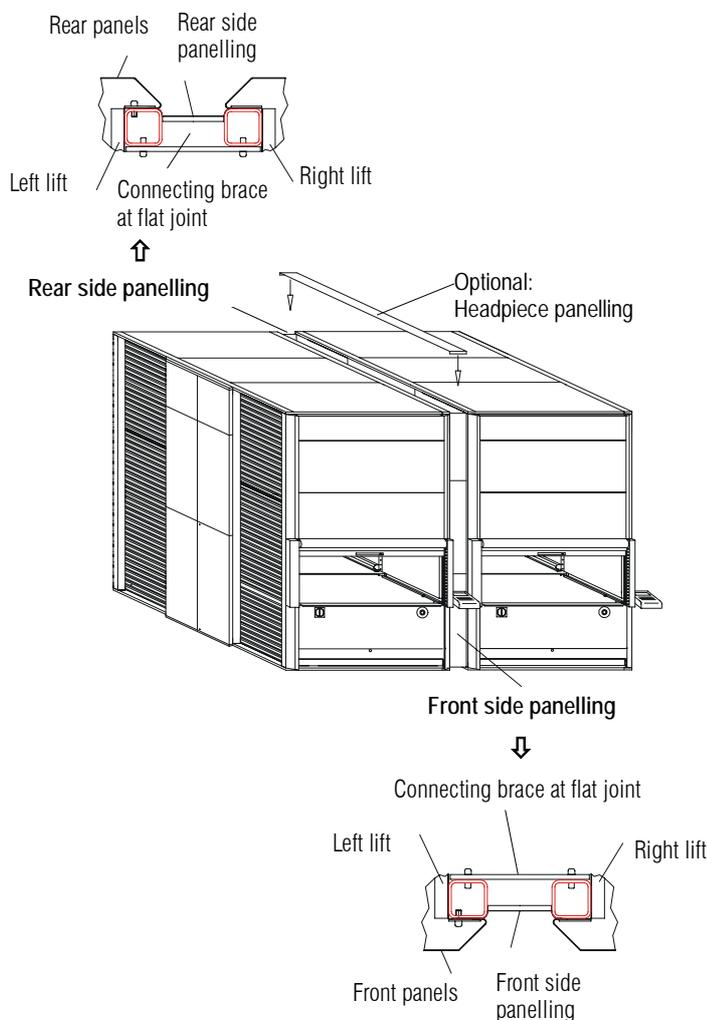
Mounting the panelling, step: rectangular tubes/side parts of adjacent lifts
